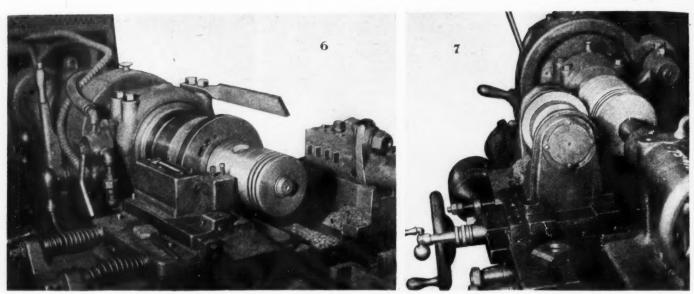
Finish turning the piston showing the device for relieving the skirt at the piston pin bosses. Fig. 7—The piston ring grooves are burnished in this operation
